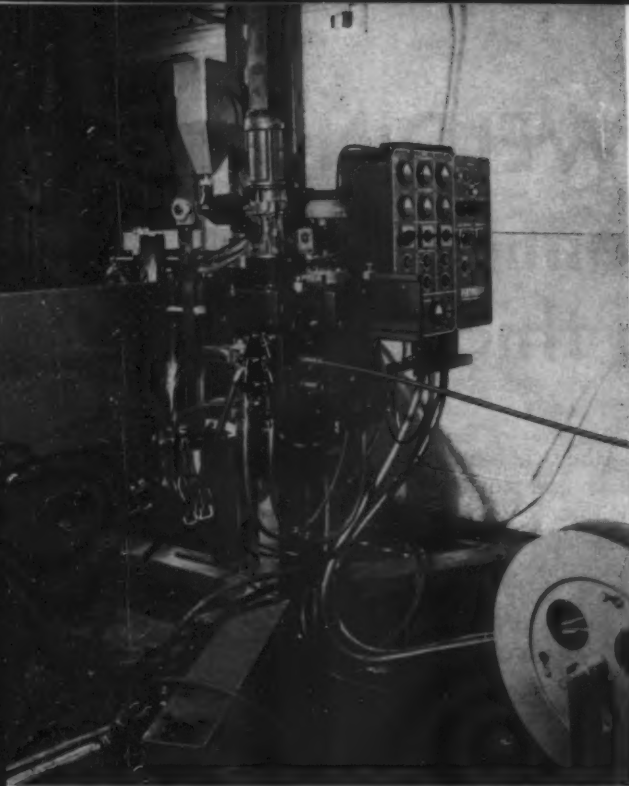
Vertomatic machine for electroslog welding consists essentially of tripod base, vertical mast, and boom which automatically carries the welding equipment upward.
